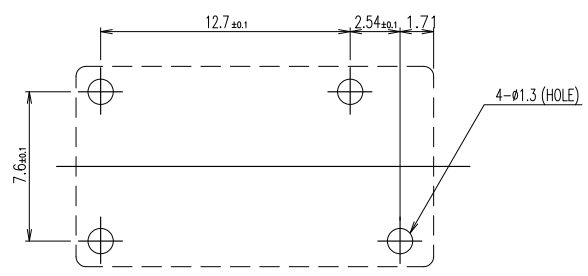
FIGURE FOR PRINTED CIRCUIT BOARD PROCESSING
